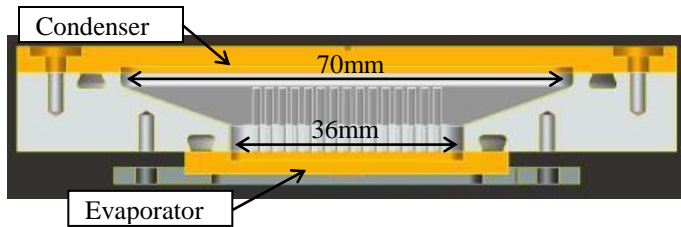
Cross-sectional diagram of the prototype heat spreader.
